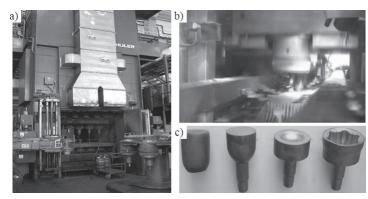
Forging process: a) crank press, b) side view of press working chamber, c) forgings after successive operations
